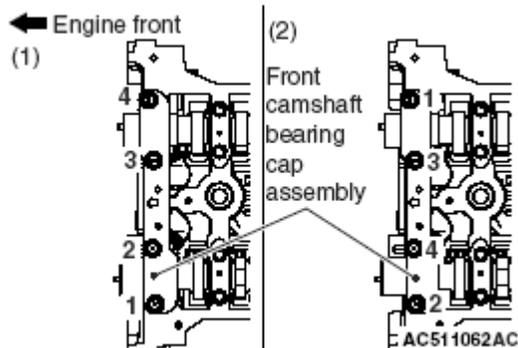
Identifying Front Camshaft Bearing Cap Assembly
